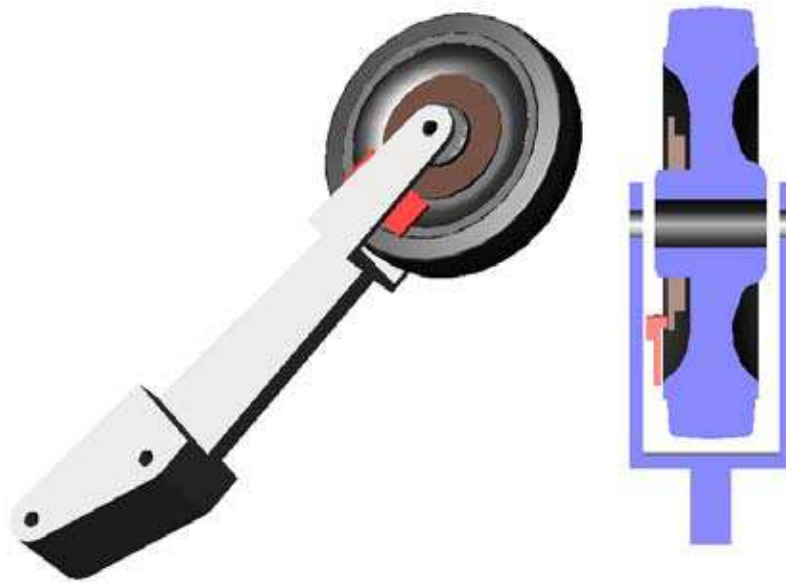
Top linkage with encoder (left), Cross section of wheel and encoder (right)
